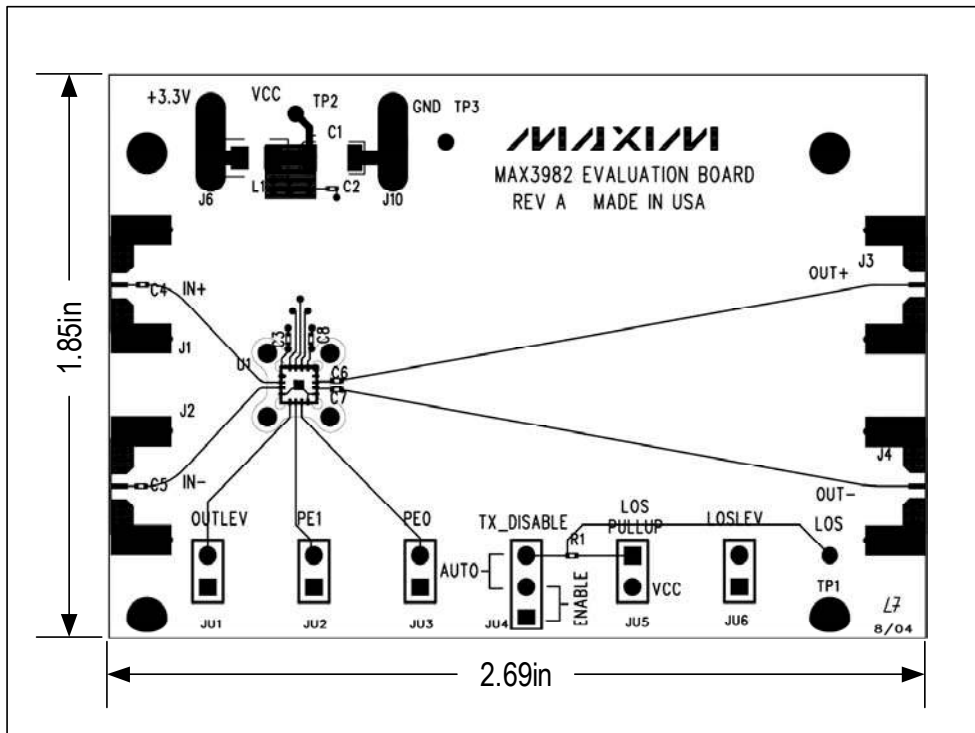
MAX3982 EV Kit Component Placement Guide – Component Side
